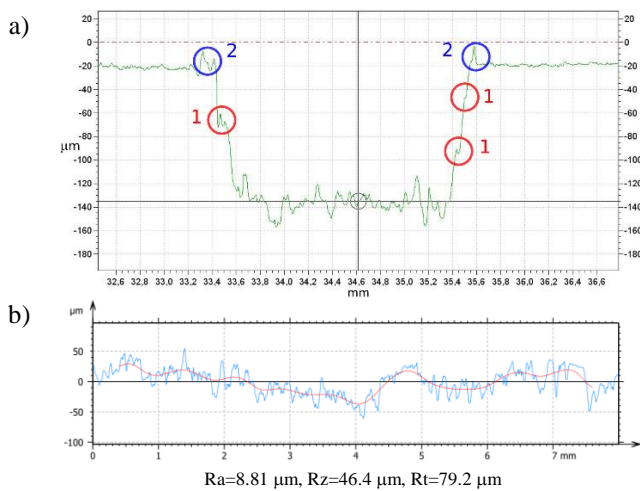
Example of groove cross-section profile (a) and machined surface profile (1 - transition between layers, 2 – burrs on the groove edge) (b); machining parameters:  $I = 3.45\text{ A}$ ,  $U = 10\text{ V}$ ,  $t_i = 200\ \mu\text{s}$ .
